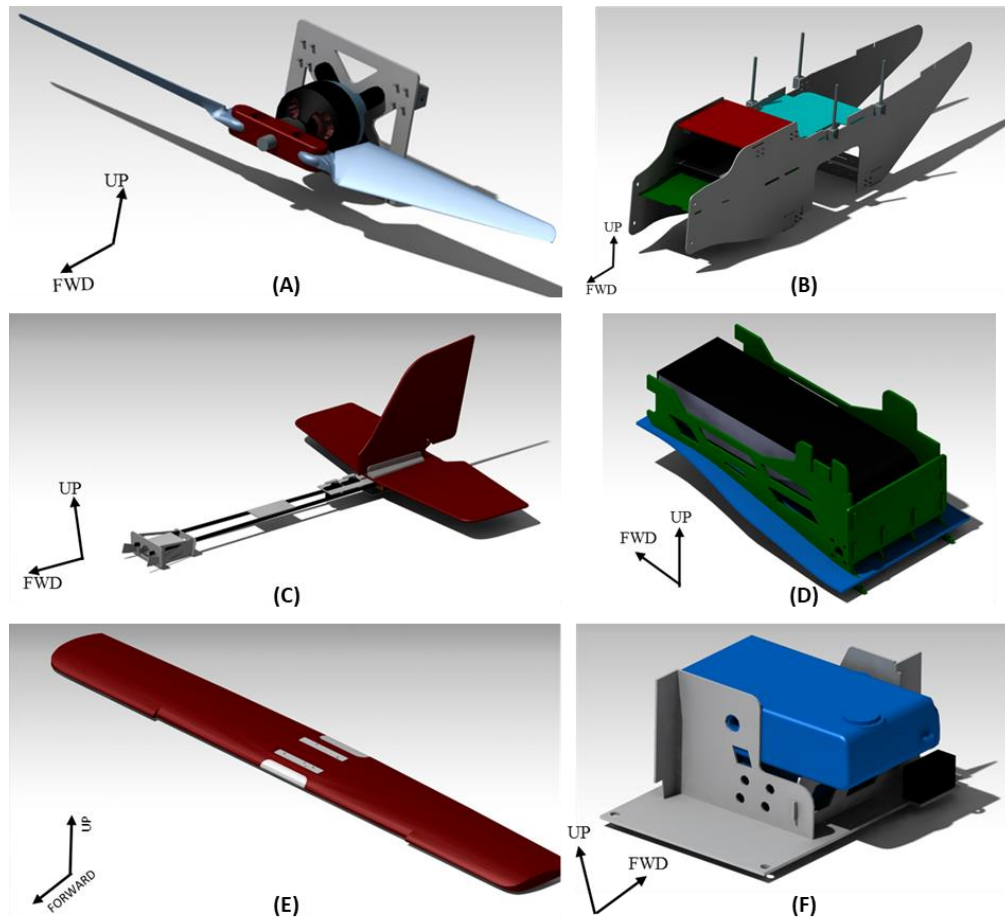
Fixed-wing UAS sub-assemblies: (A) motor & propeller, (B) main body, (C) tail, (D) battery, (E) wing, and (F) camera.
